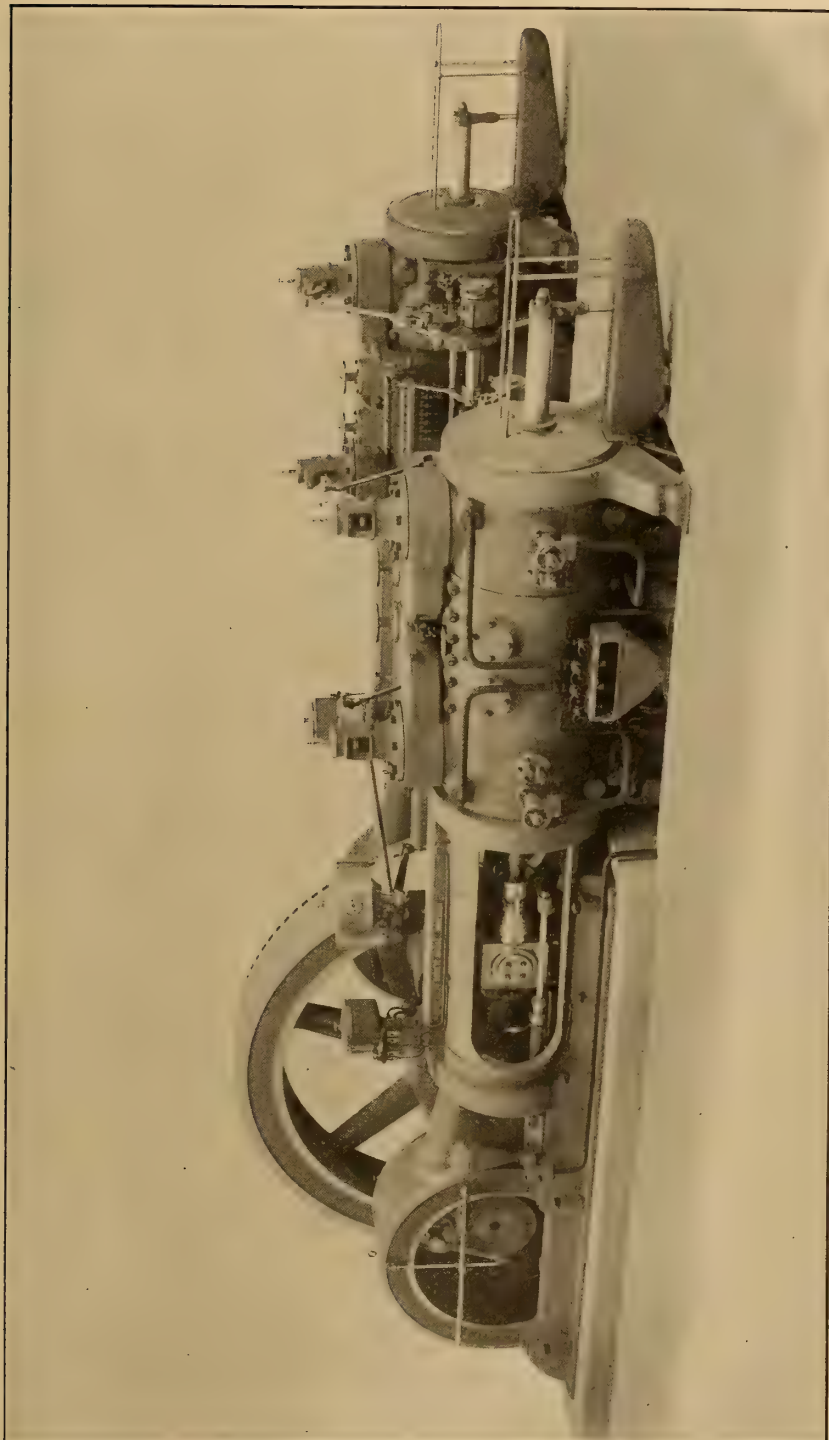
FOUR-CYLINDER, DOUBLE-ACTING GAS ENGINE. SWISS LOCOMOTIVE & MACHINE WORKS, WINTERTHUR
